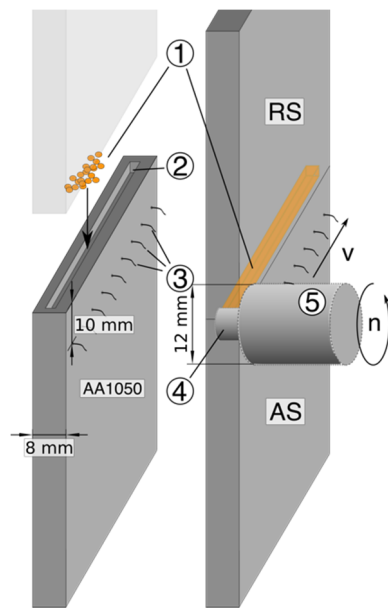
Schematic diagram of the sample production by a combination of Friction Stir Welding and Friction Stir Processing of the joint of two aluminium sheets with copper powder (1) in between. A groove (2) in the lower sheet is filled with commercially pure copper and the temperature during the process is measured by thermocouples (3). A rotating steel probe (4) with a shoulder (5) distributes the additional copper within the Aluminium matrix.
